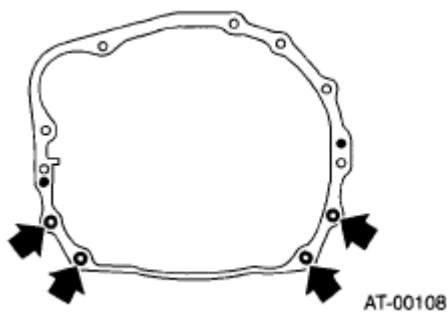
Locating Bolts And Nuts Which Hold Lower Side Of Transmission To Engine - AT Model
